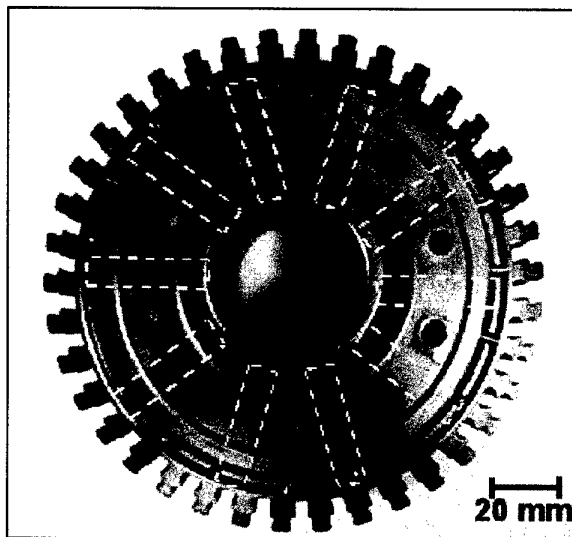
Fatigue crack growth specimen blank locations; T700 Stage 2 gas generator turbine disk.
